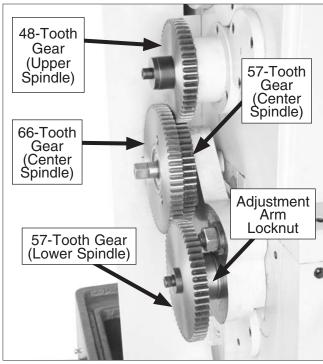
Change gear setup for dimetrial and modular thread cutting.
